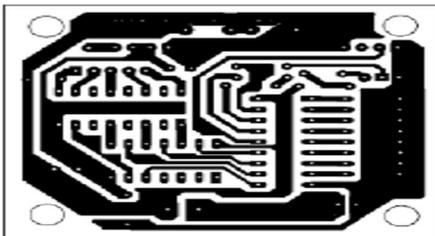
Actual-size, single-side PCB for the receiver-cum decoder circuit.
